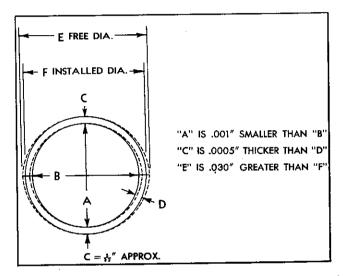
Inside Diameter of Bearing Shell at Parting Line and 90° to Parting Line.
